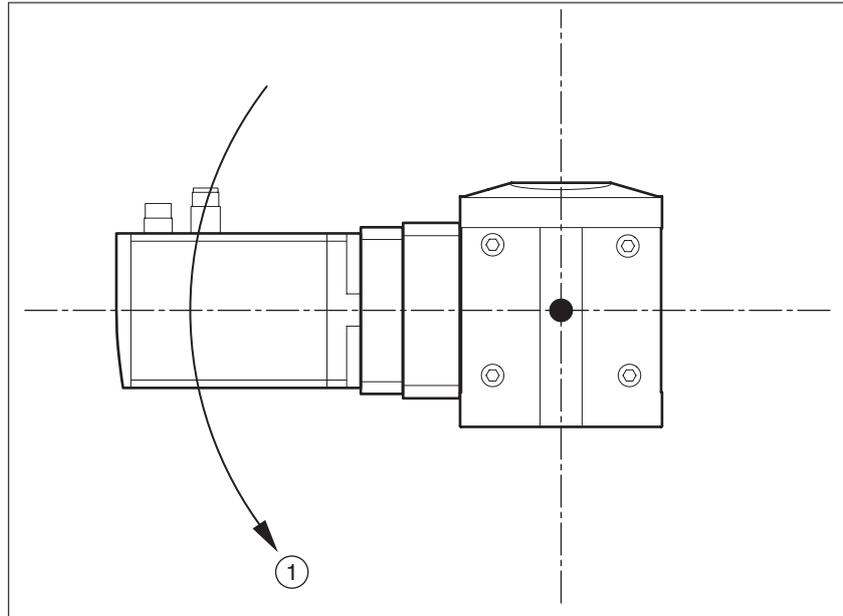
Torque at end block by mounted parts such as motor and gearbox.
